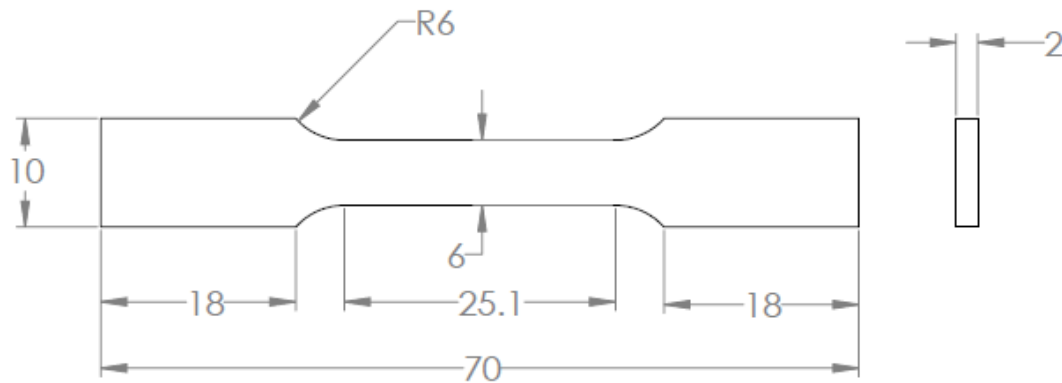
Schematic drawing of the modified subsize ASTM E8²⁵ flat dog bone style tensile specimens. The dimensions are in millimeters.
